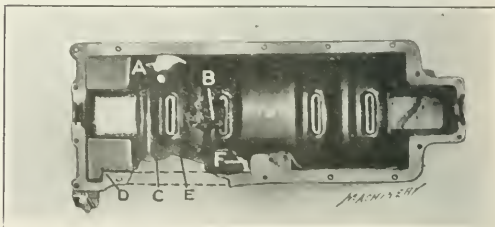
Broken Aluminum Crank-case before welding
